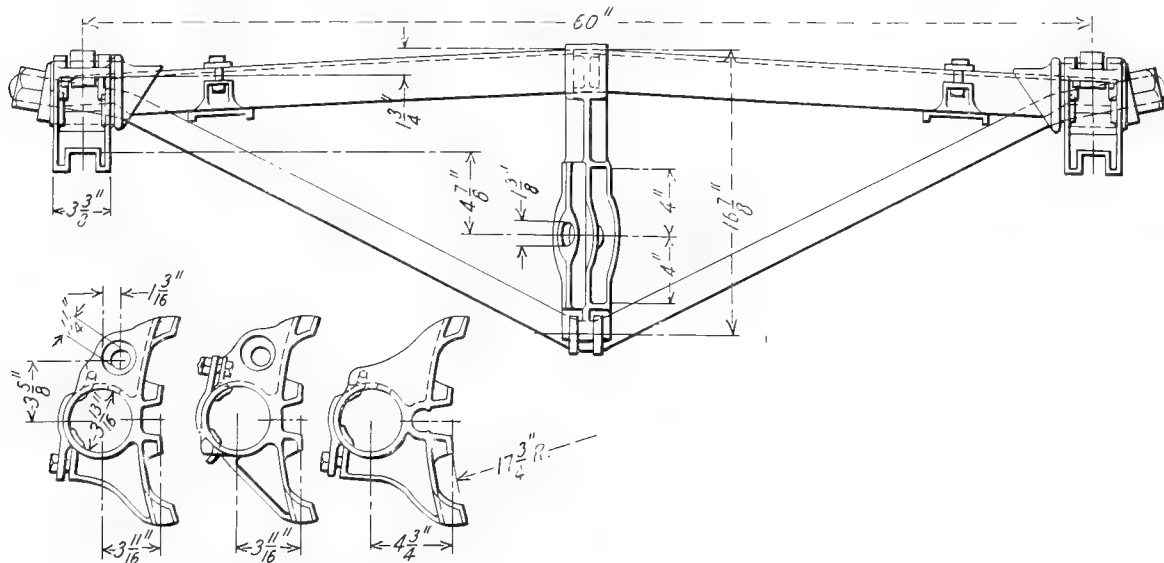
Buffalo Trussed Brake Beam No. 5. Buffalo Brake Beam Company.
